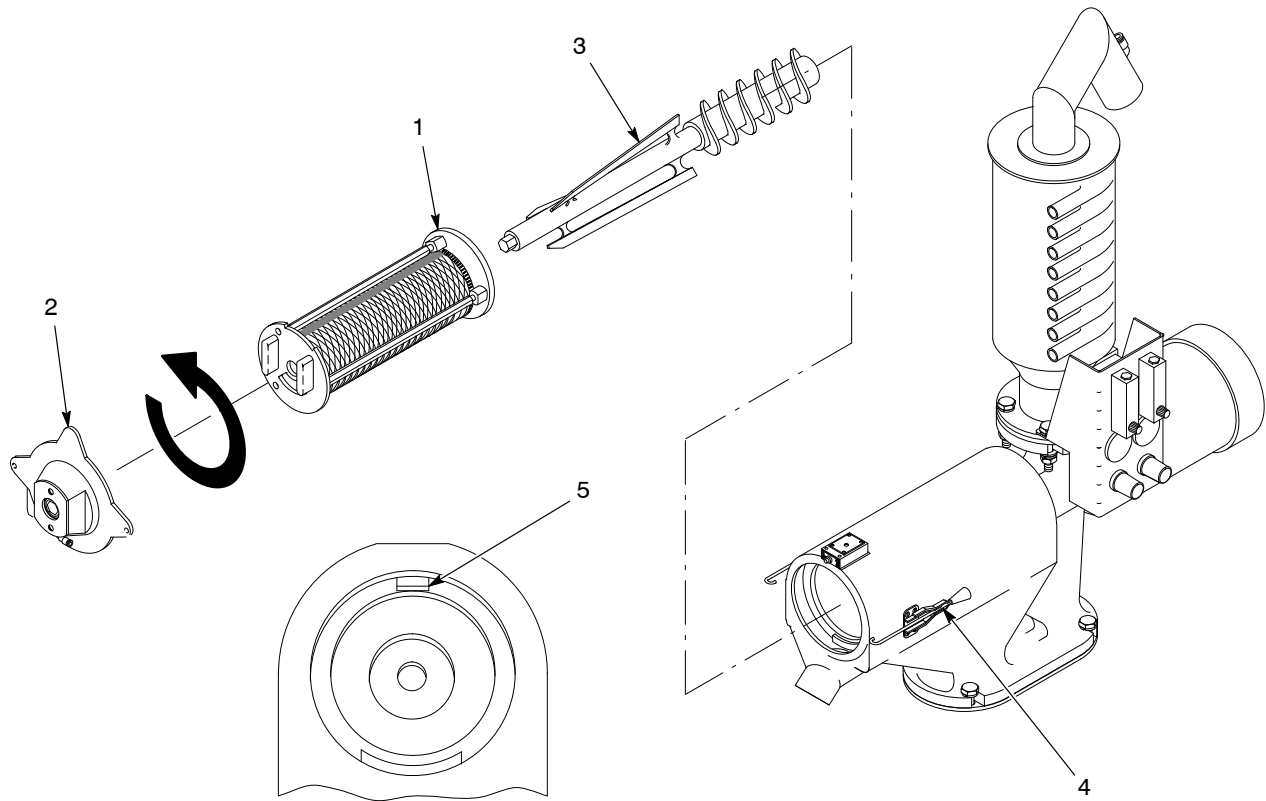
Disassembling the NRPS-100 Rotary Sieve
